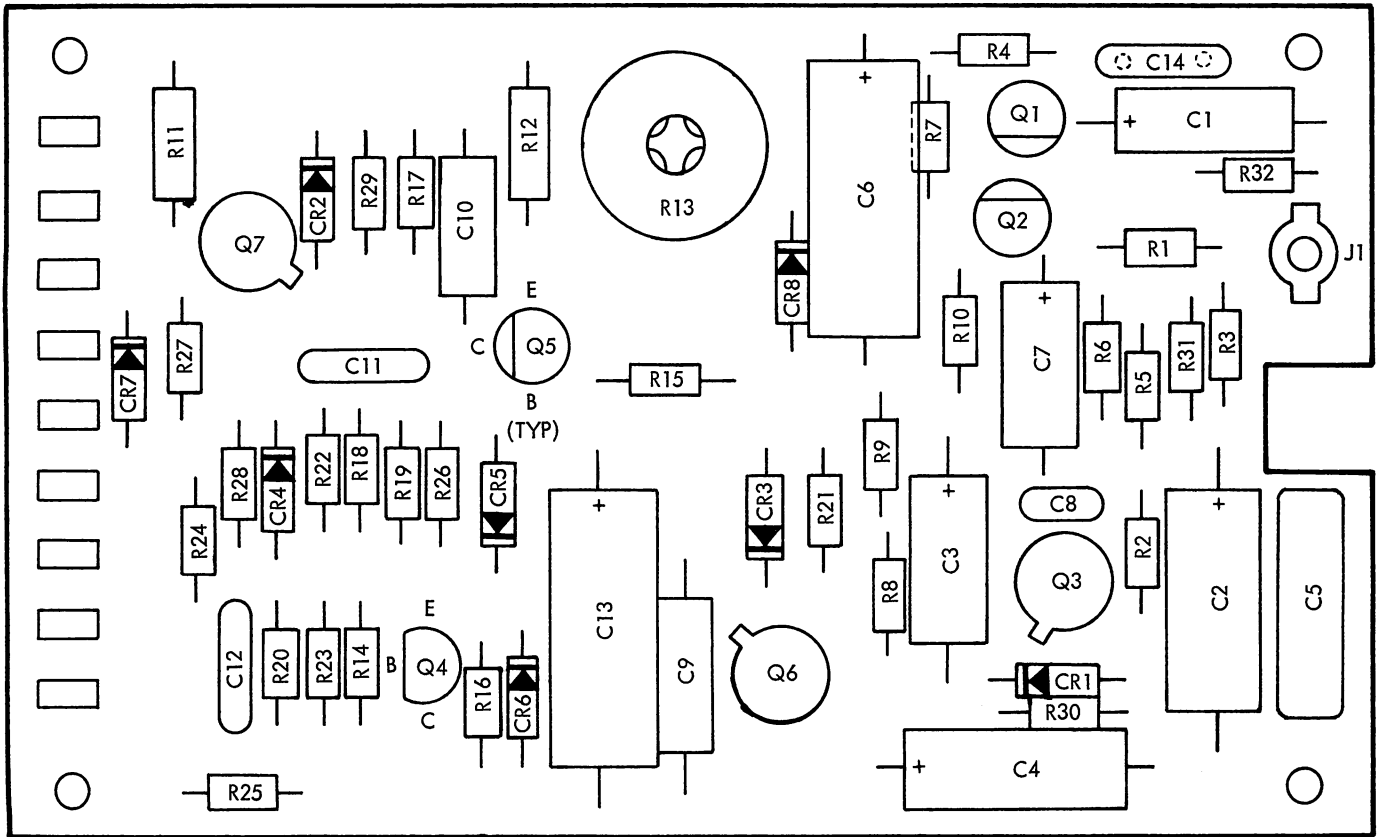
Electronic Part Locations (2C573-4), LF Power Driver PCB Assembly
